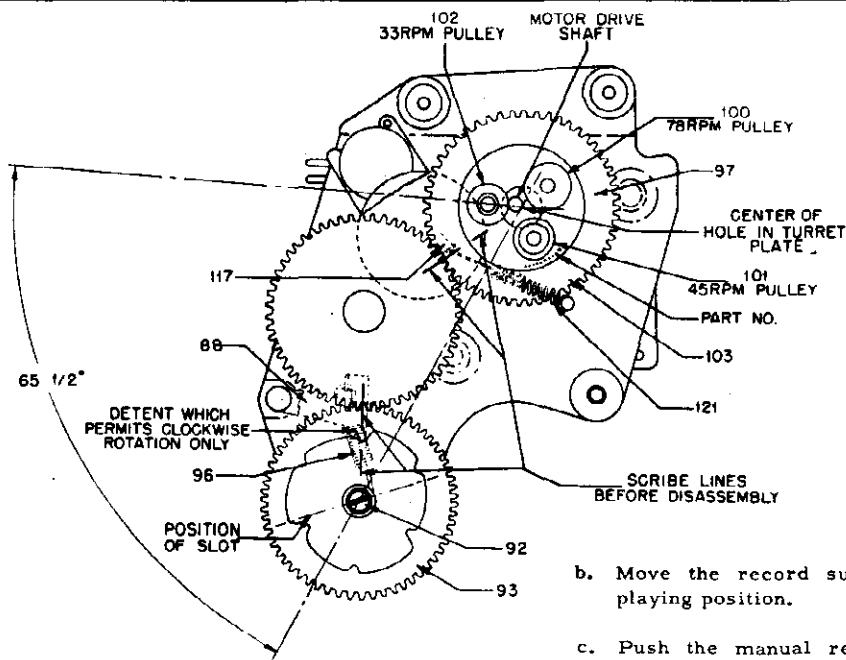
MOTOR GEAR TRAIN ASSEMBLY
